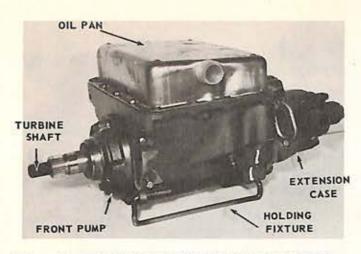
TRANSMISSION MOUNTED IN HOLDING FIXTURE
